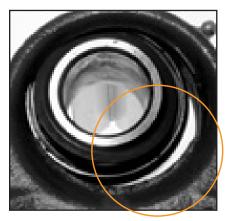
Exposure to abrasives and water in a severe environment caused extreme wear on this pillow block bearing.
